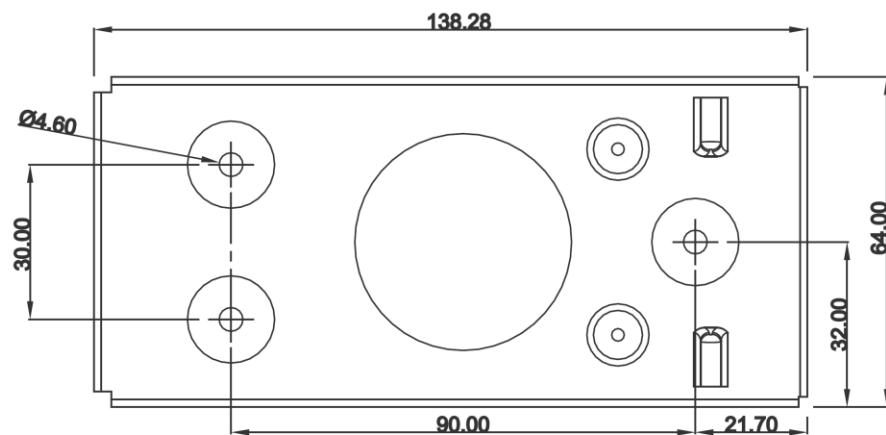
SV-XPNDR-26X Mounting Tray Dimensions
